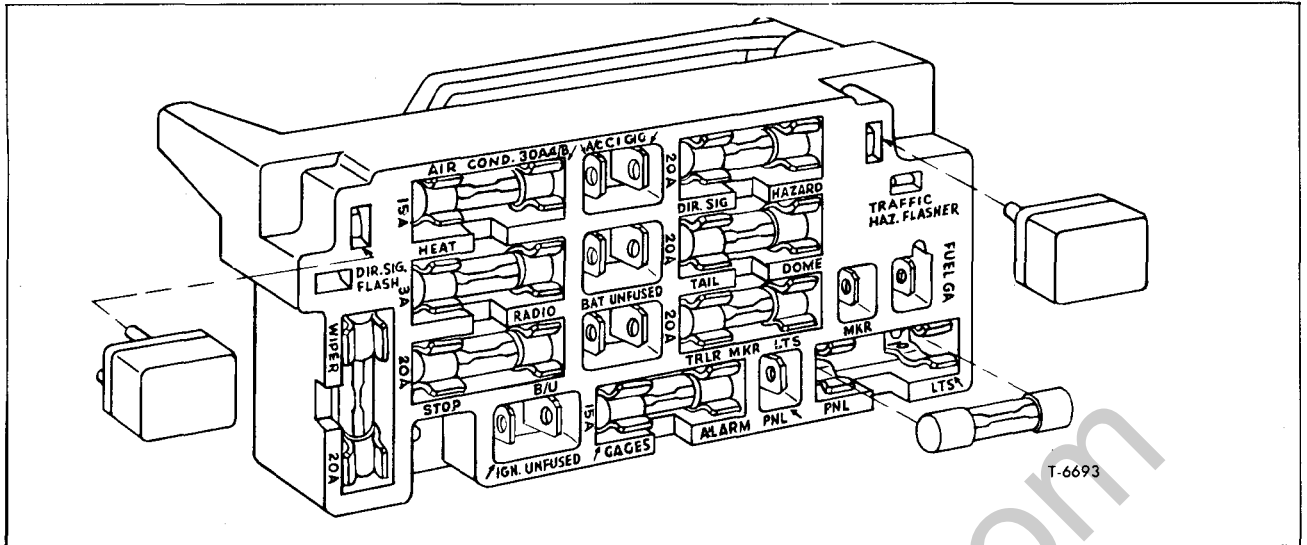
Fuse Block and Circuit Breaker Mounting (Tilt Cab Models)
